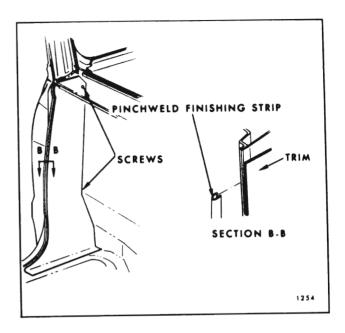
Rear Quarter Trim Assembly - "A-80" Styles and metal panel of rear quarter inner trim panel assembly. The rear quarter front trim is a sub-assembly of the rear quarter inner
